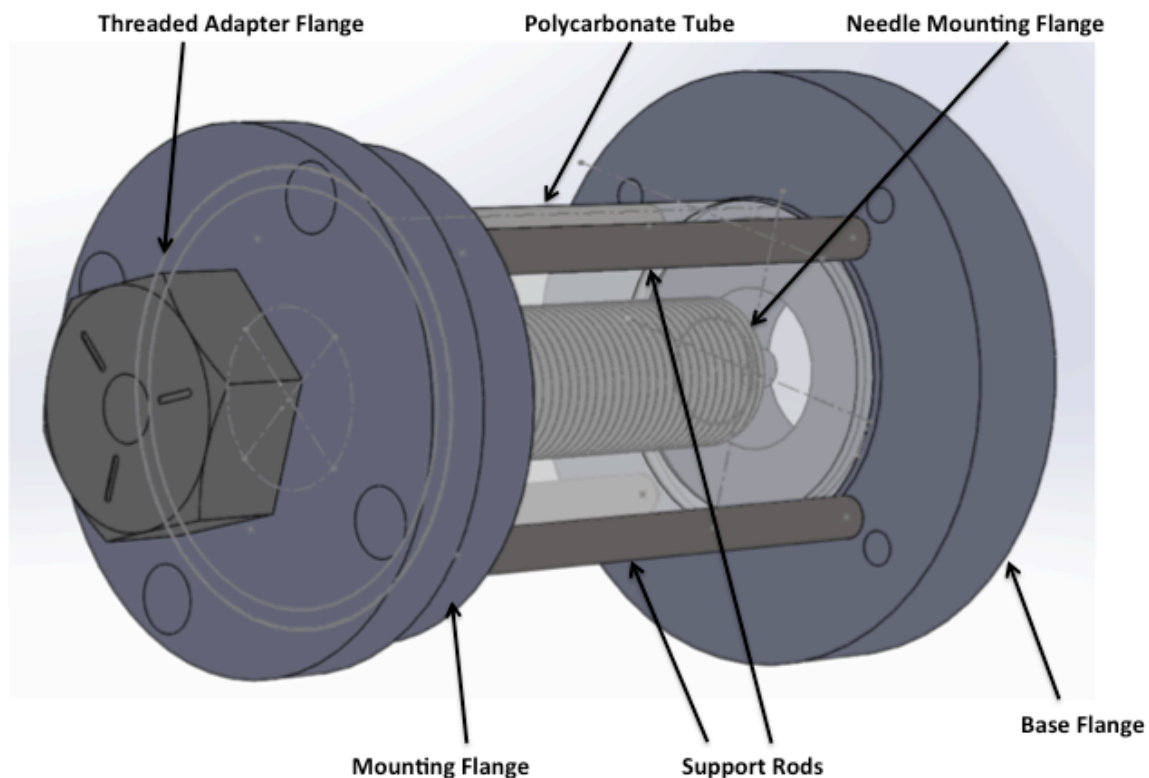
This is a schematic of the purge chamber designed and fabricated to accommodate air sensitive samples. Its assembling involves securing the polycarbonate tube in between the four support rods, the needle mounting flange, and the mounting flange. A needle mounting flange, which holds the fused silica tip assembly, is bolted onto the end of the threaded adapter flange. The threaded adapter flange is bolted onto the mounting flange using oversized washers for positional adjustments in all directions. O-rings are used to ensure all surfaces seal.
